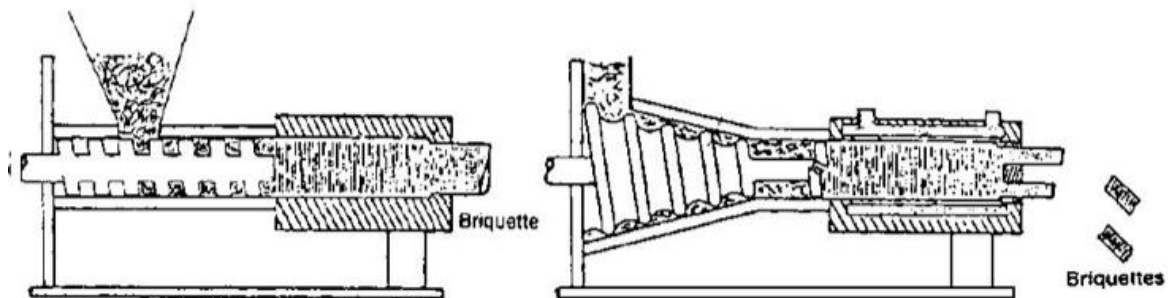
Schematic diagram of screw pressing briquetting machine
